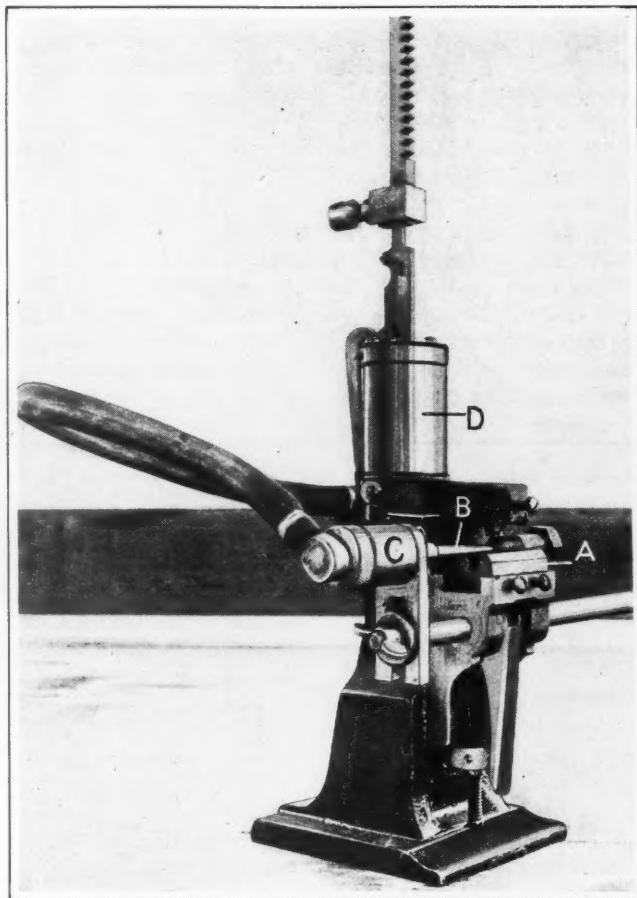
Quick-acting Jig made by Caulkins & Carpenter for drilling Cross-holes in Pins
